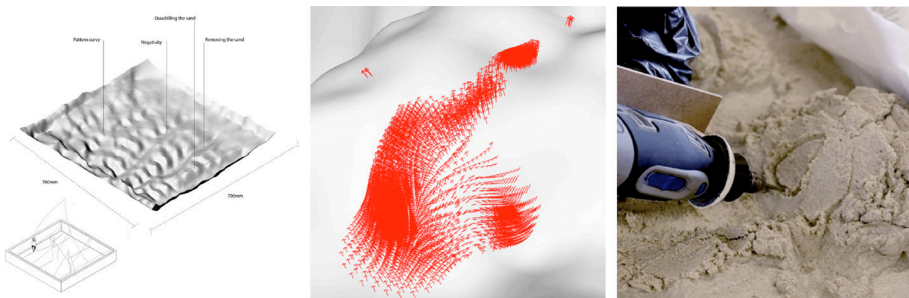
Performing integrated fabrication on a single material: a milling toolpath executed on solidified sand that was previously shaped using robotic tools.
